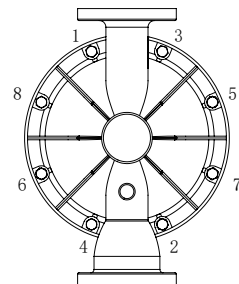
Disassembly Sequence of Bolts on Outer Chamber 外腔体螺栓的拆卸顺序
